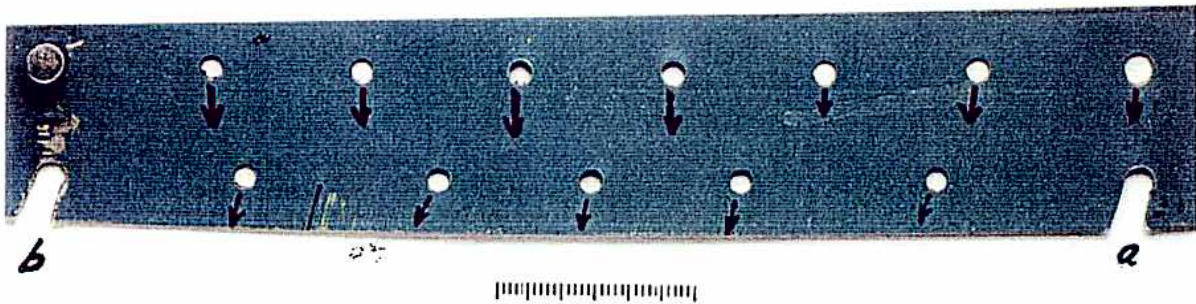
Interior surface location from the top surface of the rear tail boom unit, representing the rivet joint in question. Bore edge deformation is marked by red arrows.
